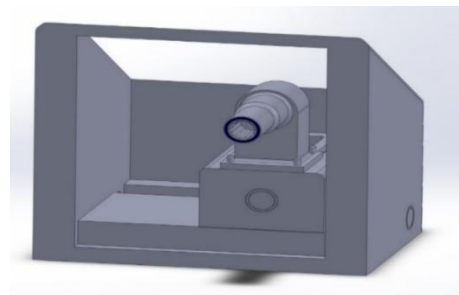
Bolt Holder Mechanism Moved to Right and Front Position
